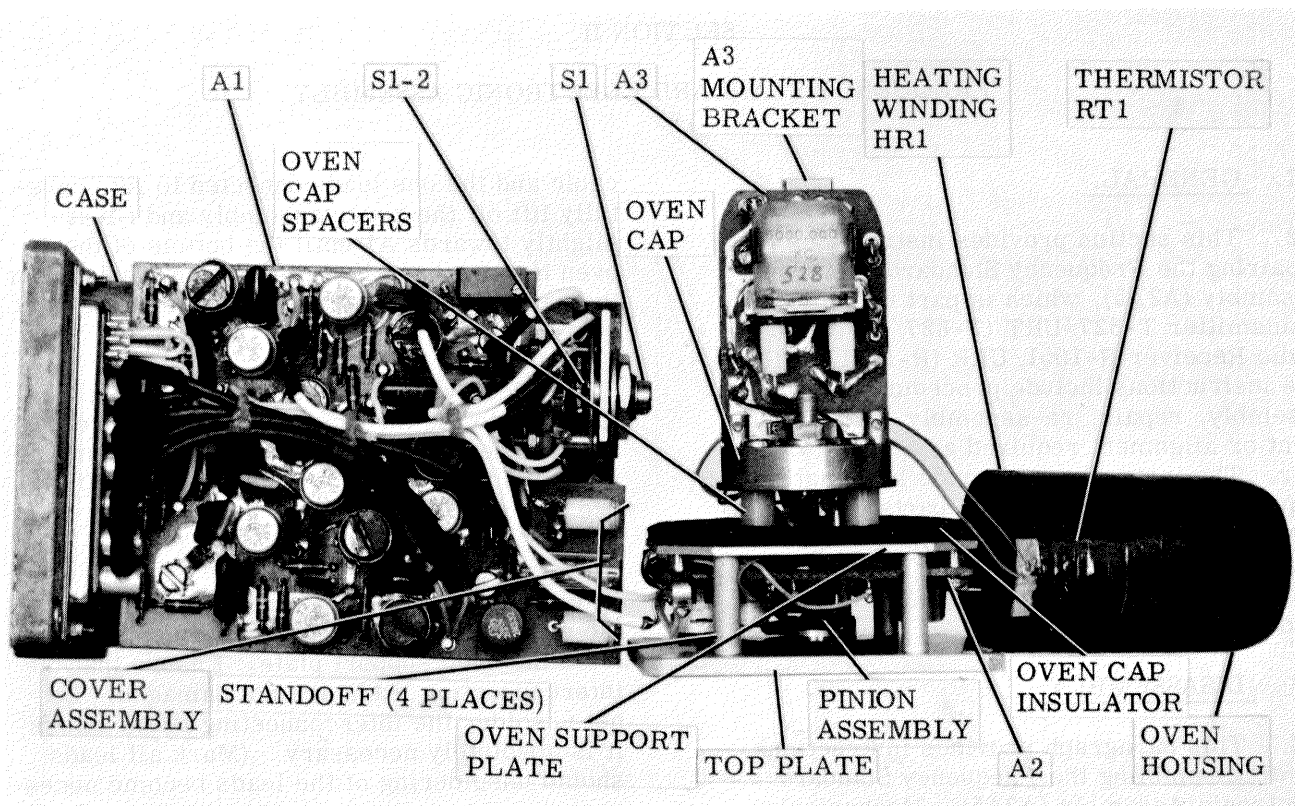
Frequency Standard Electronic Assembly, Component Location
